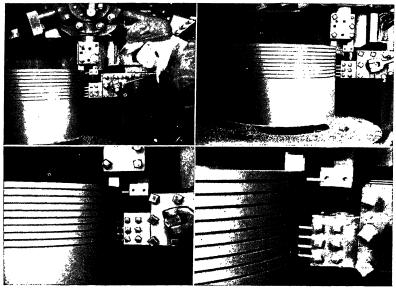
Cutting cast-iron piston rings. A hollow cylinder is cast and machined over all, and the rings are cut off as shown. (The Bullard Co.)
